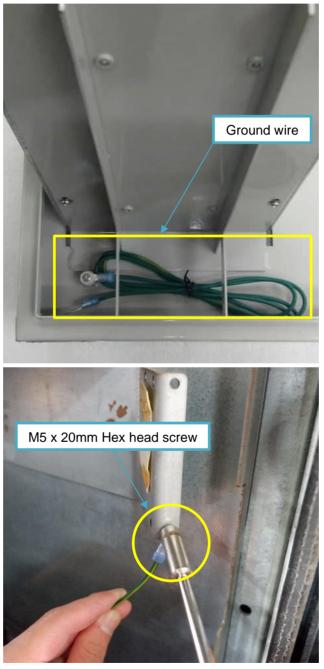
Tighten the screw using T socket wrench size 8mm.
